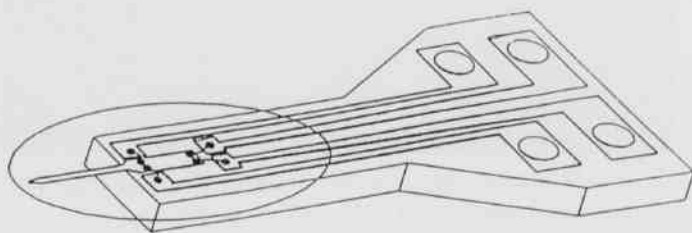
A complete probe assembly consisting of microprobes bonded onto a printed circuit board carrier.
